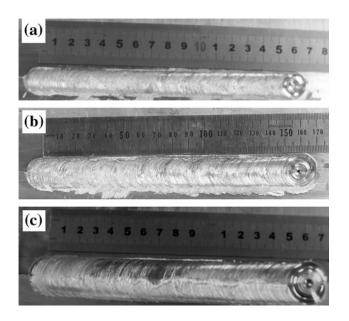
(a) Weld produced at 950 rpm and 150 mm/min with the 15-mm shoulder diameter tool. (b) Weld produced at 950 rpm and 50 mm/min with the 18-mm shoulder diameter tool. (c) Weld produced at 950 rpm and 150 mm/min with the 25-mm shoulder diameter tool
